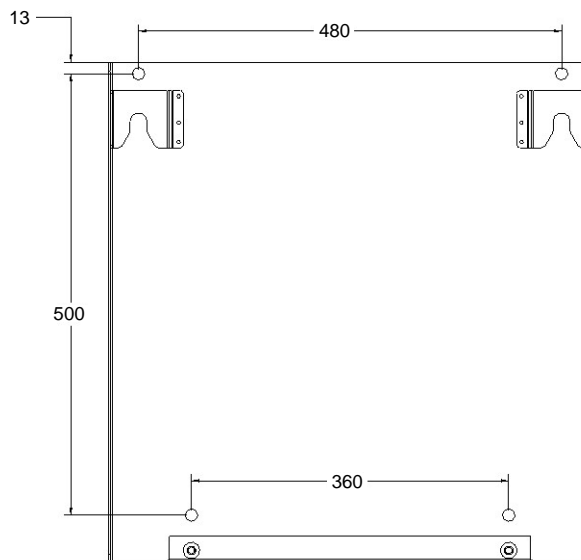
MTS 4 – Drill Hole Position for the Mounting Plate
